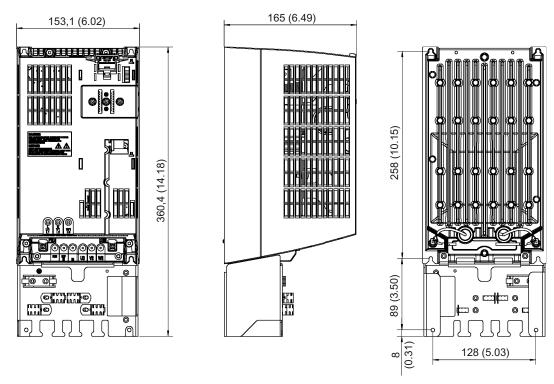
Dimension drawing, PM340 Power Module with screening kit, frame size FSB, dimensions in mm (inches)
